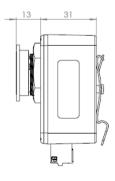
Patch Board Mk2 Enclosure Dimensions (mm)
